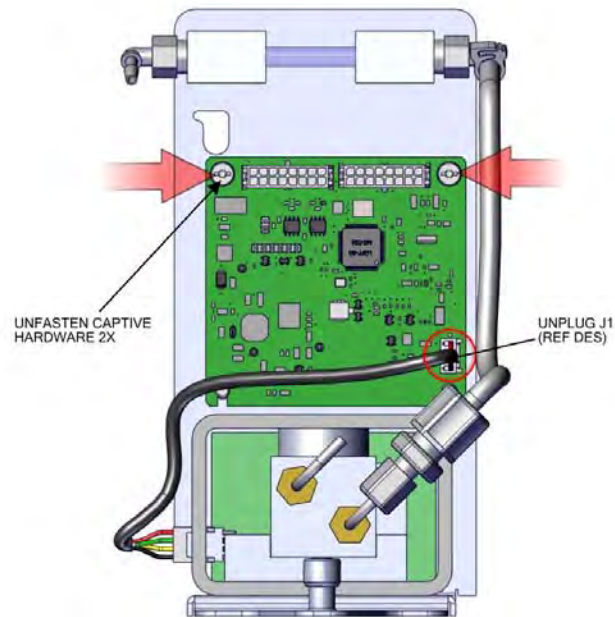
Replacing the Oxygen Sensor DMC Board
